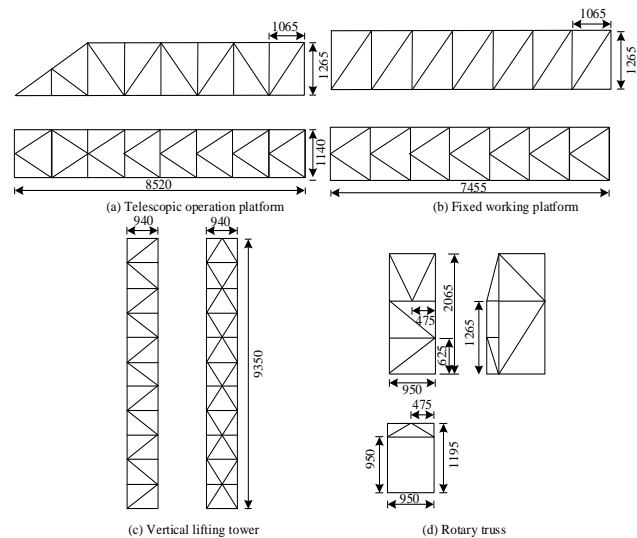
Common truss bridge inspection vehicle core structure dimensions.
